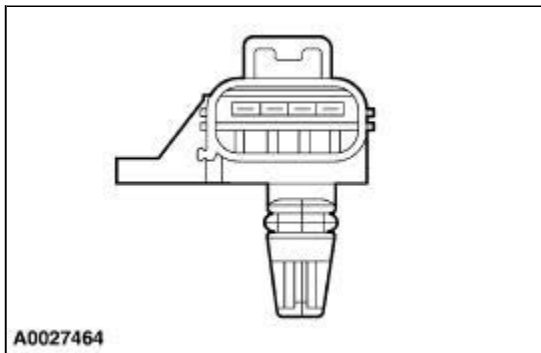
Thermal Manifold Absolute Pressure (TMAP) Sensor
